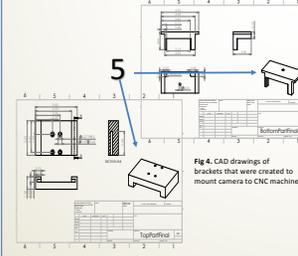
CAD drawings of brackets that were created to mount camera to CNC machine
